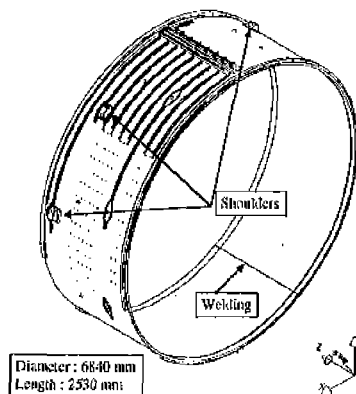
Module of the external cylinder. Each module is composed of 3 elements: a 50 mm thick shell, two 100 mm thick end flanges, and shoulders where the coil support system is attached through tie rods.
